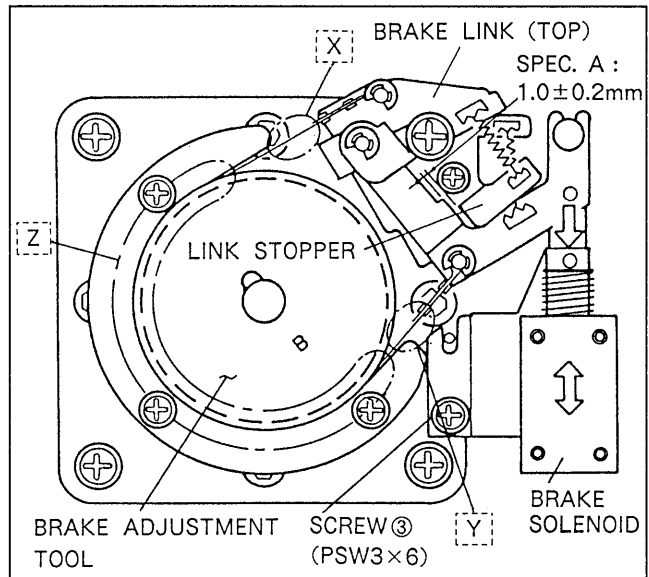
Link Stopper/Brake Solenoid Position Adjustment
